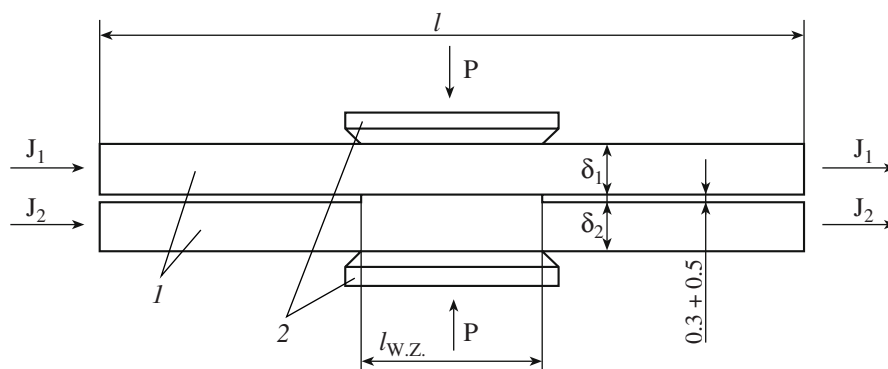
Diagram of pulse current treatment of welding pieces: (1) samples; (2) device clamp; $l_{w.z.}$ is the welding zone length; l is the sample length; and δ_1 and δ_2 are the sample thickness.
